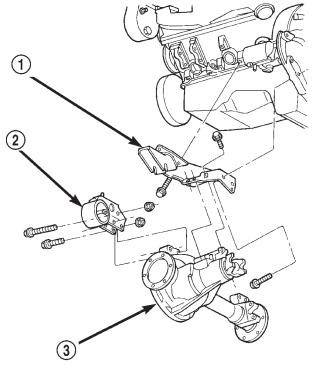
Right Engine Mount Insulator and Support Bracket
